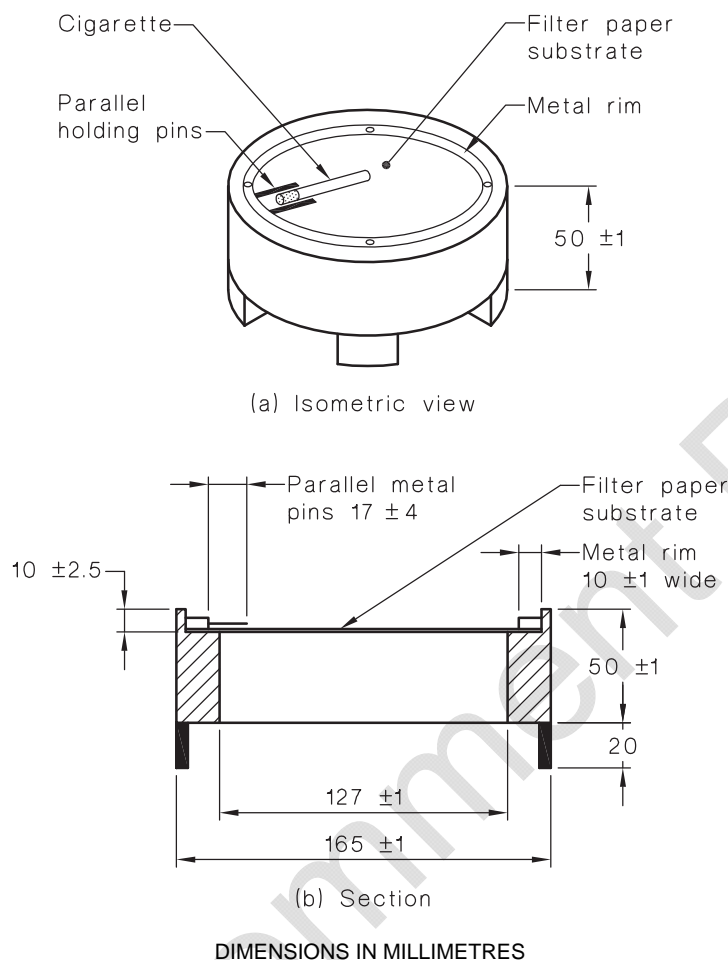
Diagram of test specimen, filter paper holder, metal pins and metal rim
